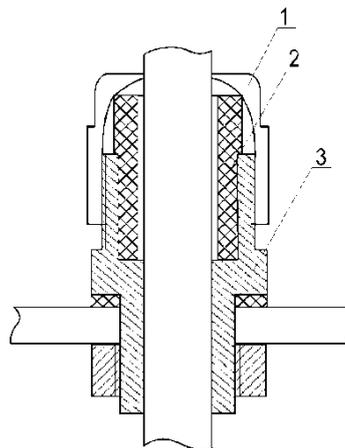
Sealed cable entry of electronics module, VMPL3.857.001
